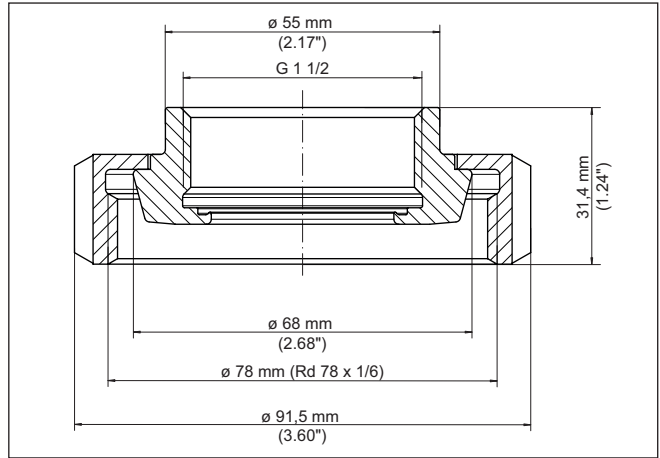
Dimensions of hygienic adapter G $\frac{1}{2}$ (DIN 3852-X) on slotted nut DN 50 (DIN 11851) PN 40
